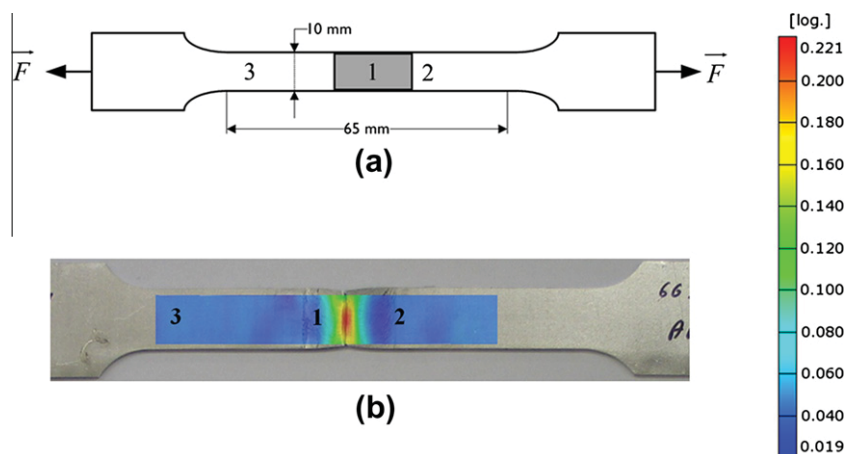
Transverse tensile specimen: 1 – Weld; 2 – HAZ; 3 – BM.
